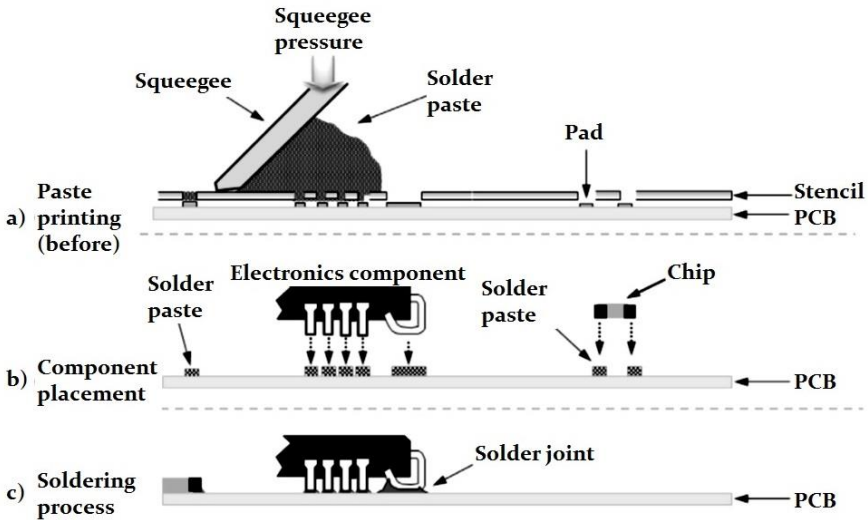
The Surface Mount Technology (SMT) assembly process [11]
